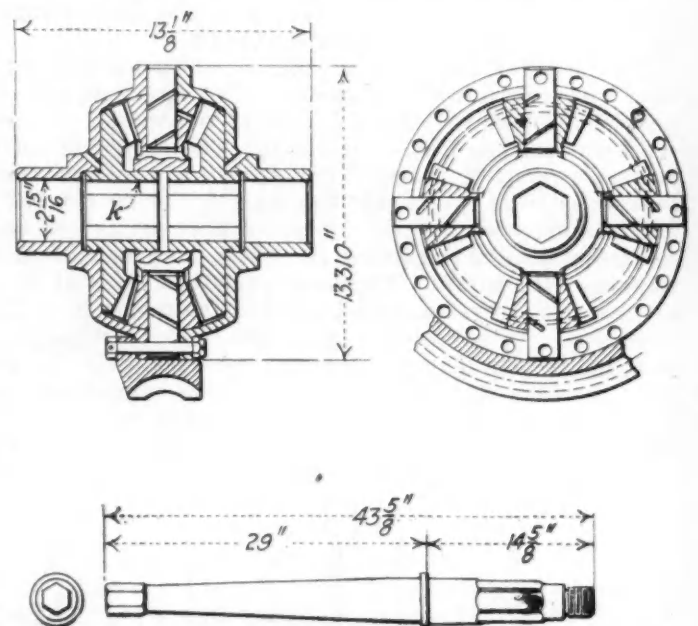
DETAIL OF THE AXLE SHAFT IN THE LOWER PORTION AND ABOVE THE ASSEMBLY DRAWING SHOWING THE METHOD OF ATTACHING THE WHEEL TO THE AXLE
